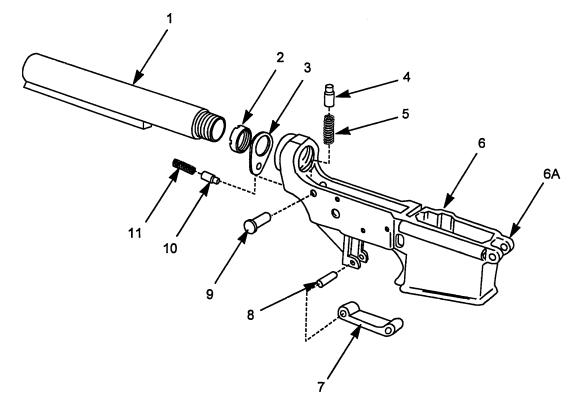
A. Lower Receiver and Receiver Extension Assembly (M4) 9390011 and (M4A1) 12972690
